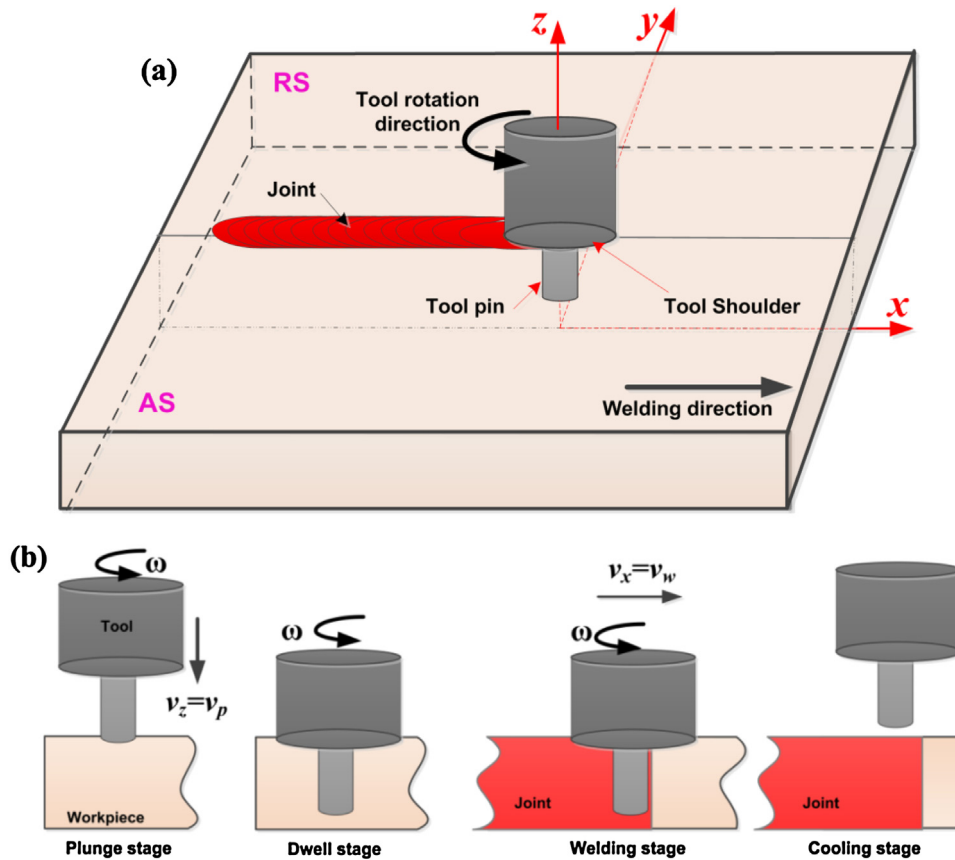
Schematic drawings of (a) friction stir welding (FSW) process, (b) different stages in FSW.
